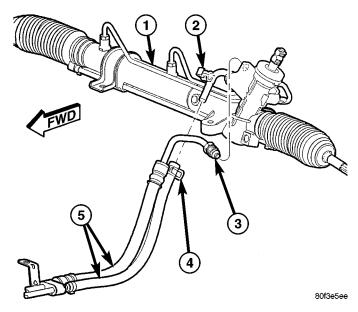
Hoses At Power Steering Gear - 2.4L Turbo
